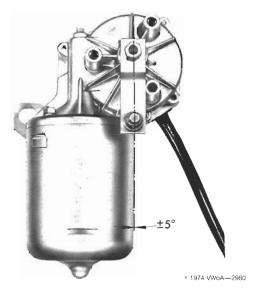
Correct position of drive crank in the parking position. The axis of the crank can deviate from the side of the pole housing by an angle of \pm 5°.
